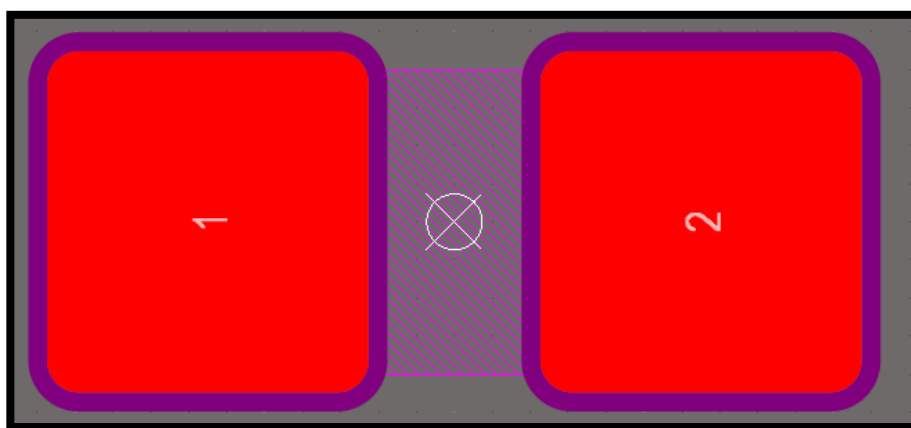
The PCB Footprint for the 0603 Package Resistors in the Library
